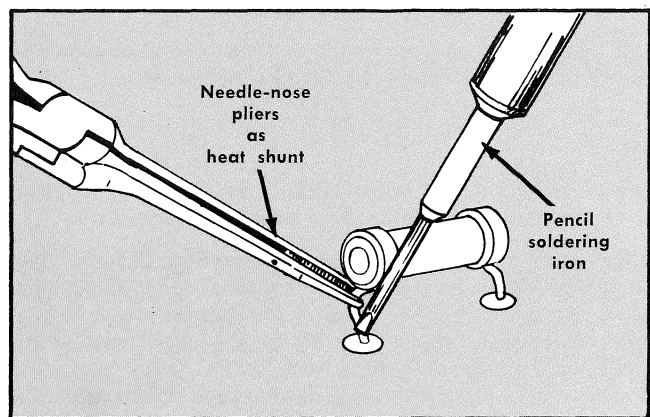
Apply the soldering iron to the heat-shunted lead when removing a component from a circuit card.
